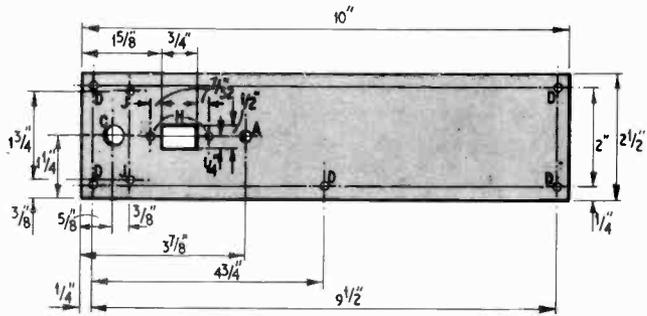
Tuning drive assembly is mounted on this aluminium plate (front view)
